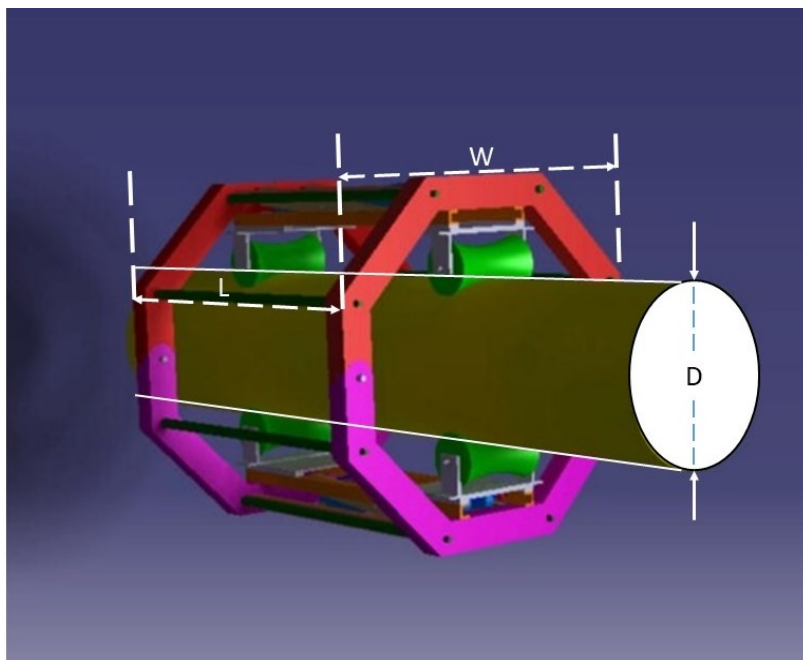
FINAL CHASSIS DIMENSIONS
